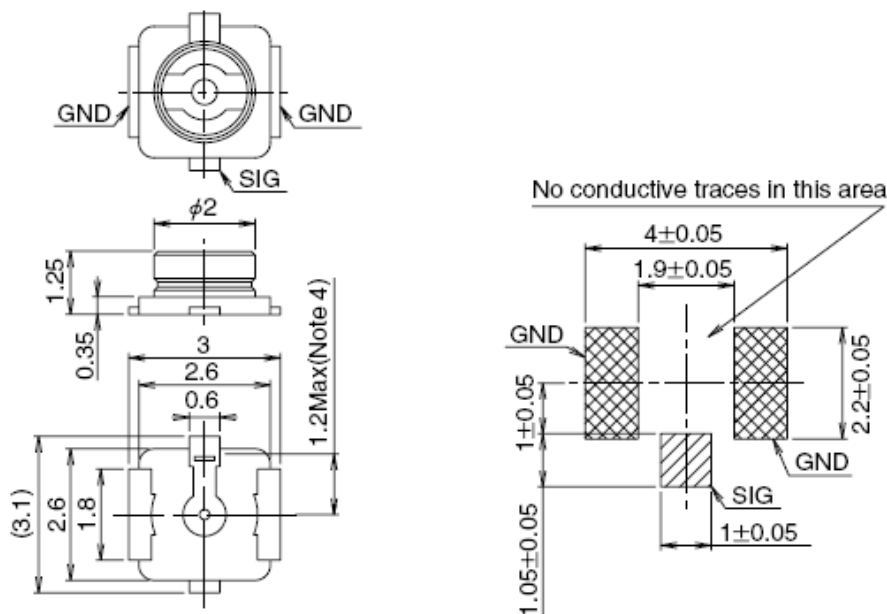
Dimensions of the U.FL-R-SMT Connector (Unit: mm)
